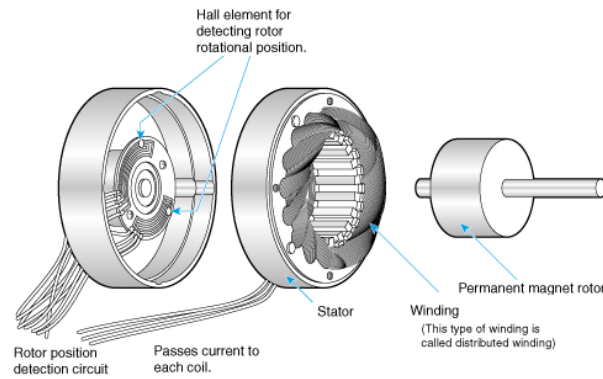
Basic arrangement of rotor and sensor elements in BLDC motor [52]
